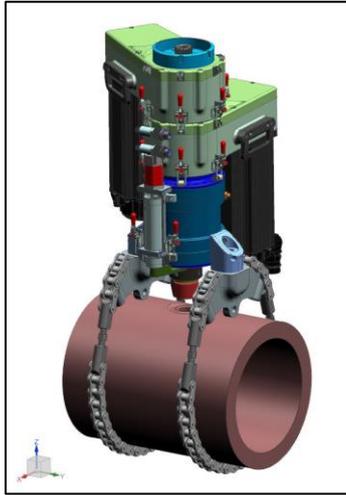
Design of the in-house commissioned WC4 Boss Welding Machine mounted on a modelled specimen
